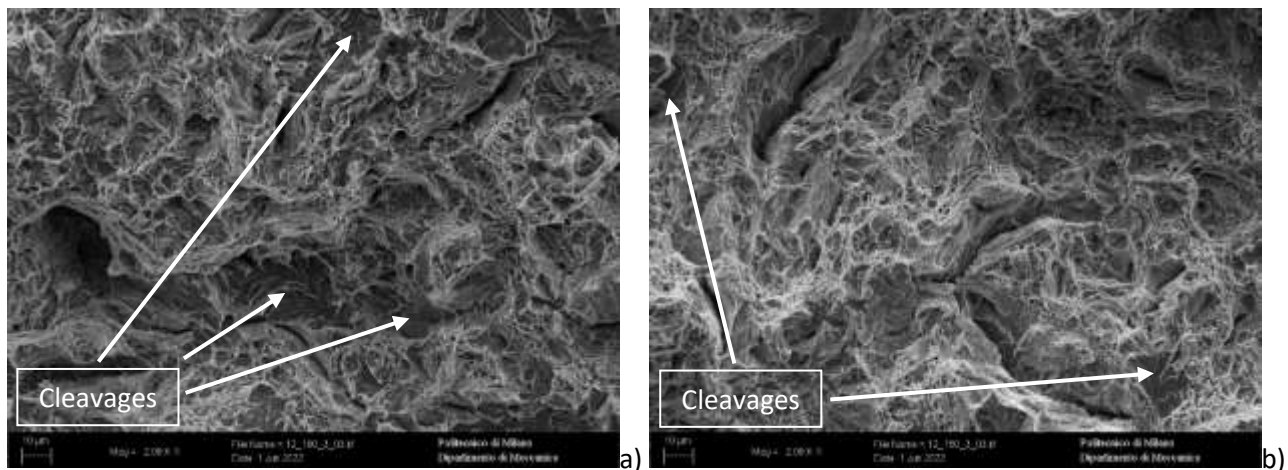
Fracture surfaces of 12 mm diameter samples. 100°C, 3h - Prevalently ductile fracture surface with some cleavage areas. Some secondary cracks are visible too (a), 150°C, 3h - Prevalently ductile fracture surface with some cleavage areas. Some secondary cracks are visible too (b).
